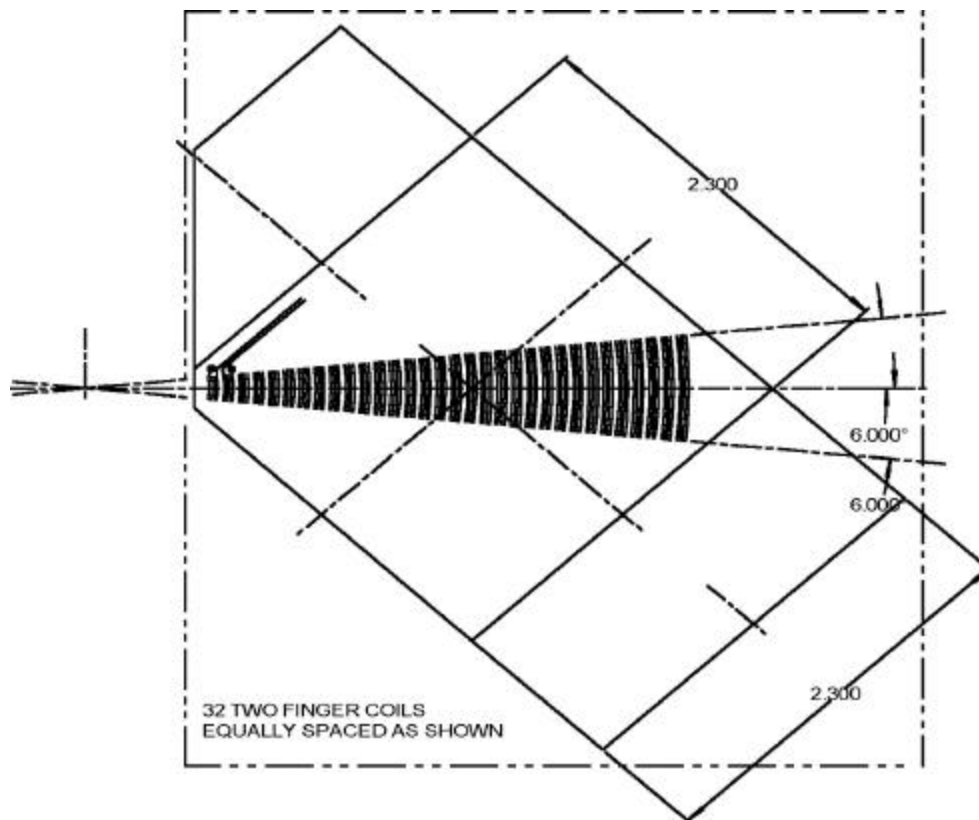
Multi-Element Phased Array EMAT Coil Used for Inspection of NSWC-Supplied Plate Weld
